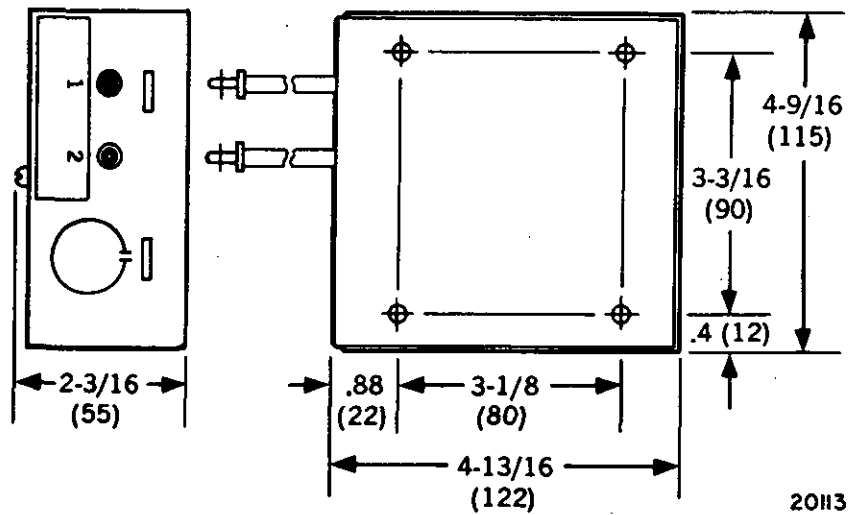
P765 E/P Transducer Approximate Dimensions in Inches (Millimeters).
